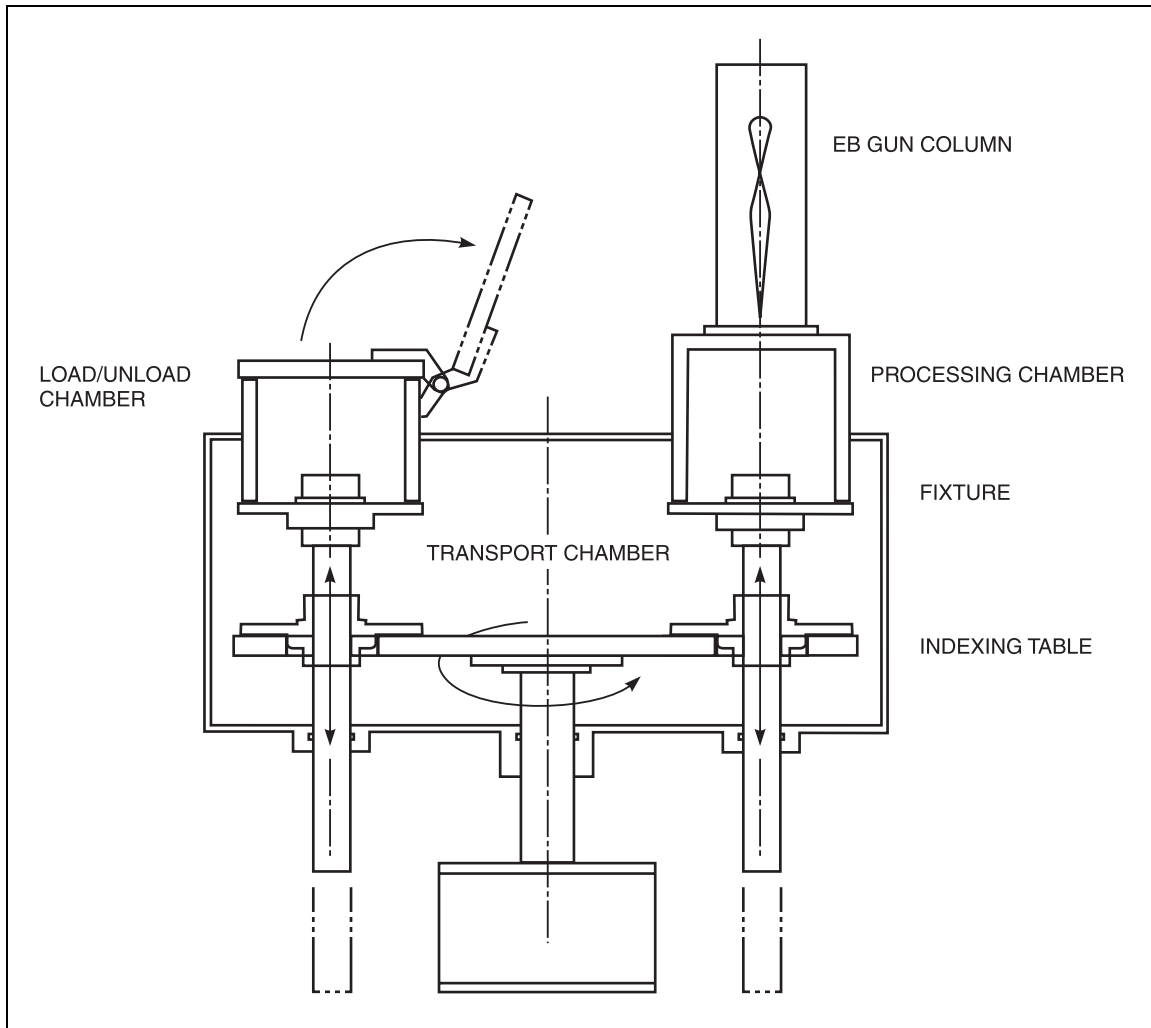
A Medium-Vacuum Electron Beam Welding System Capable of Prepumping for Continuous Workpiece Feeding
